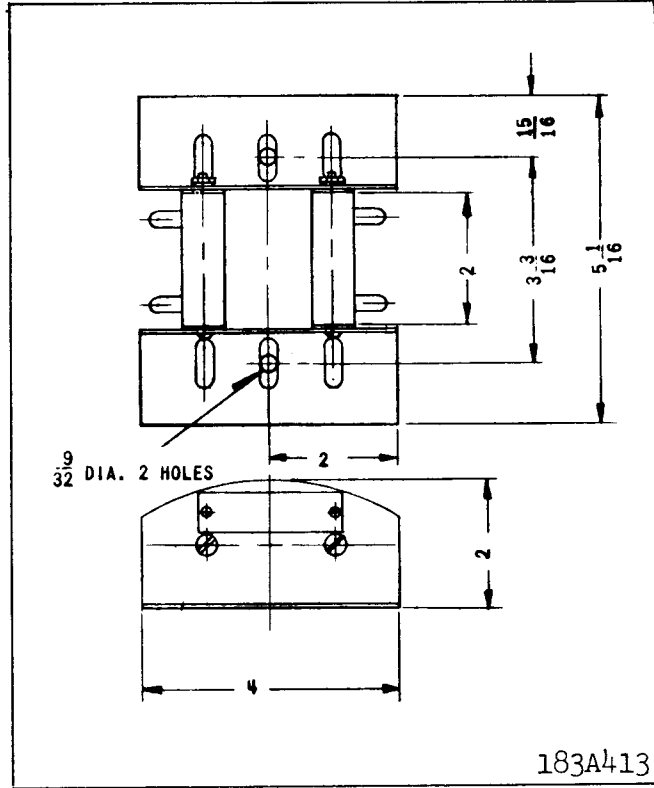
Outline & Drilling Plan for External Remote Trip
